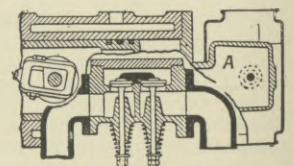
Hornsby-Ackroyd Engine (section through valves, vaporizer, and cylinder).
